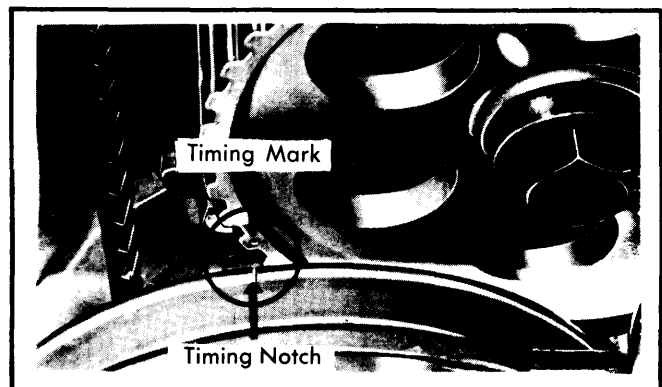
Intermediate Shaft Sprocket Aligned with TDC Notch in Crankshaft Pulley
